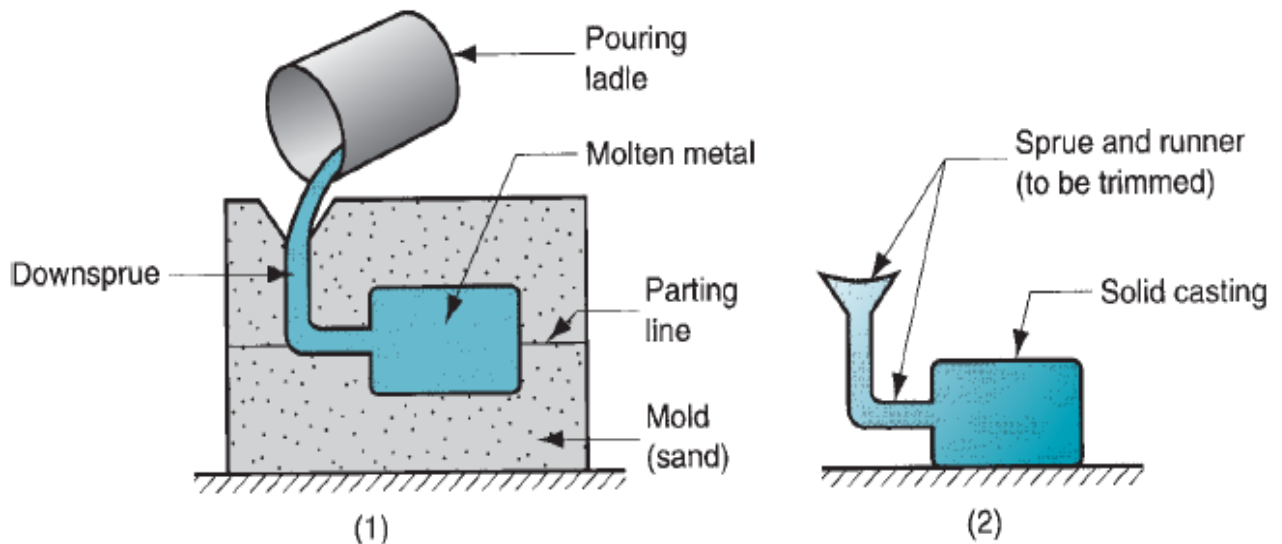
Casting Processes; (1) metal pouring, (2) solidify
